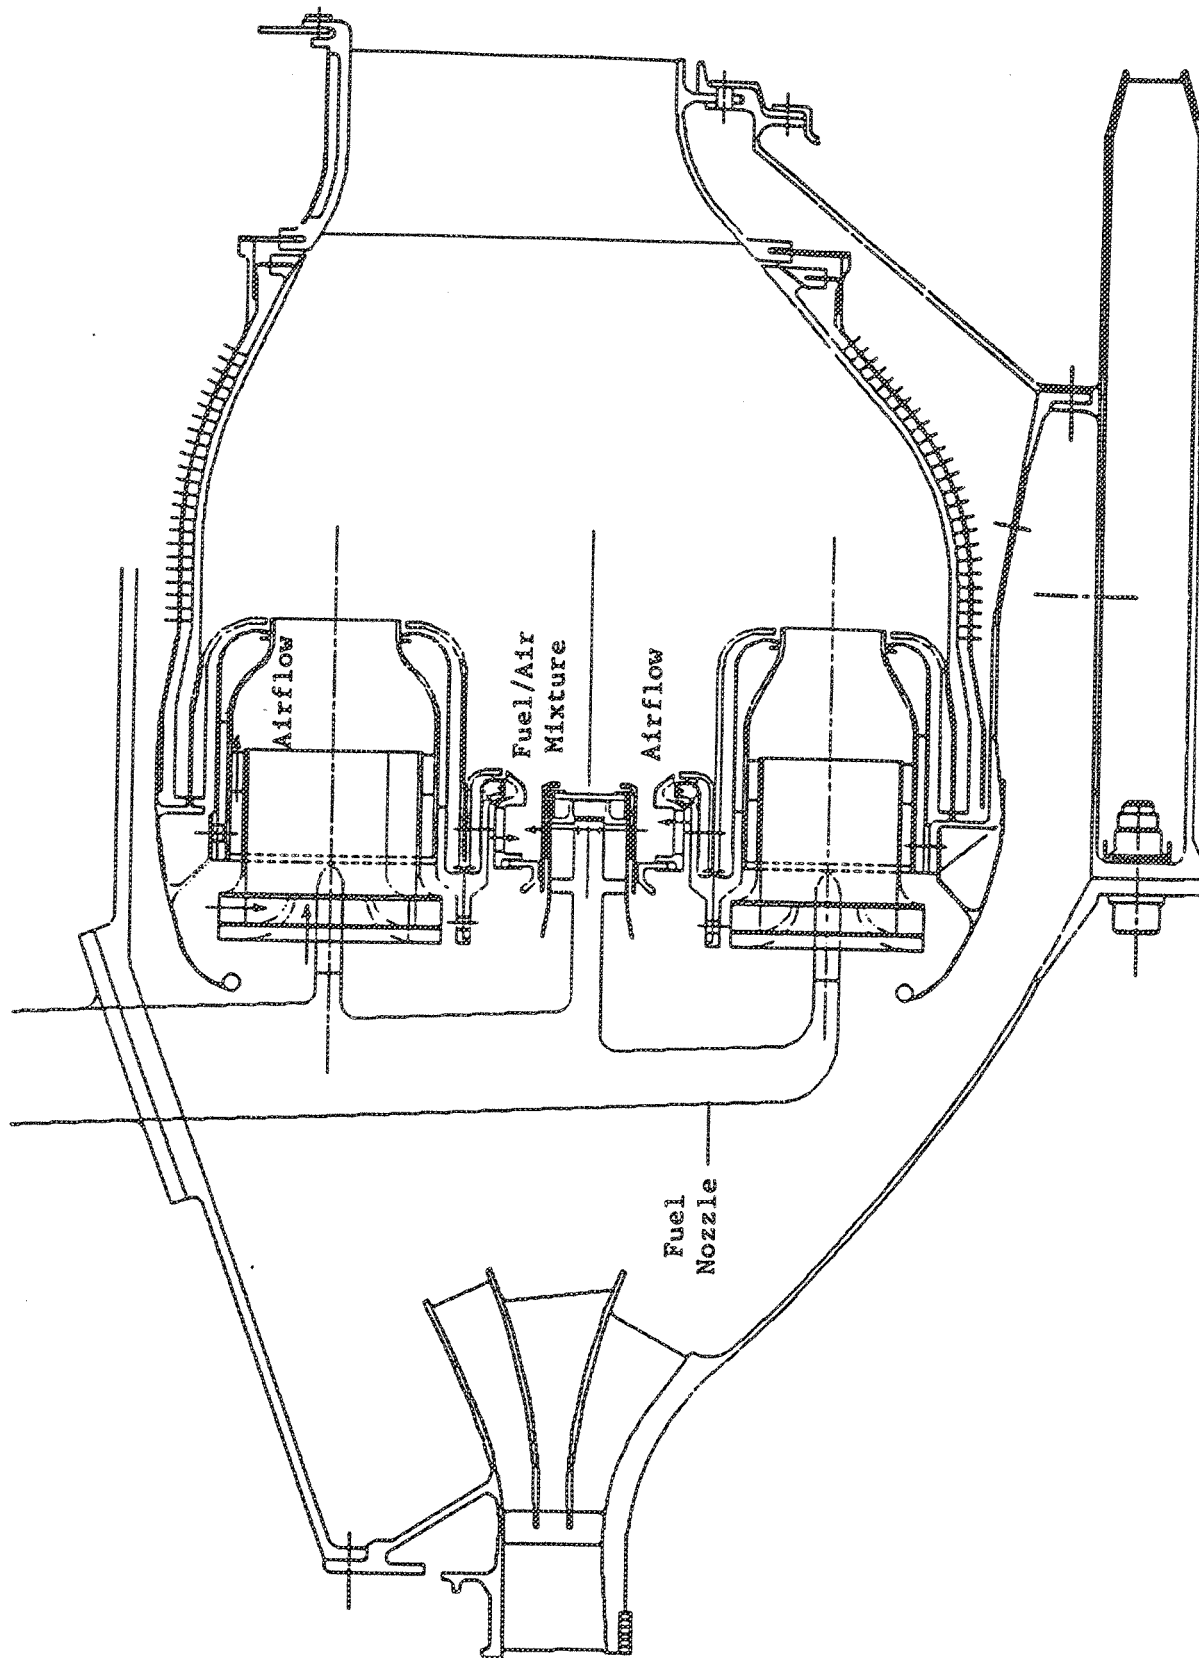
Swirl-Jet Combustor Mechanical Design Section C-C.
